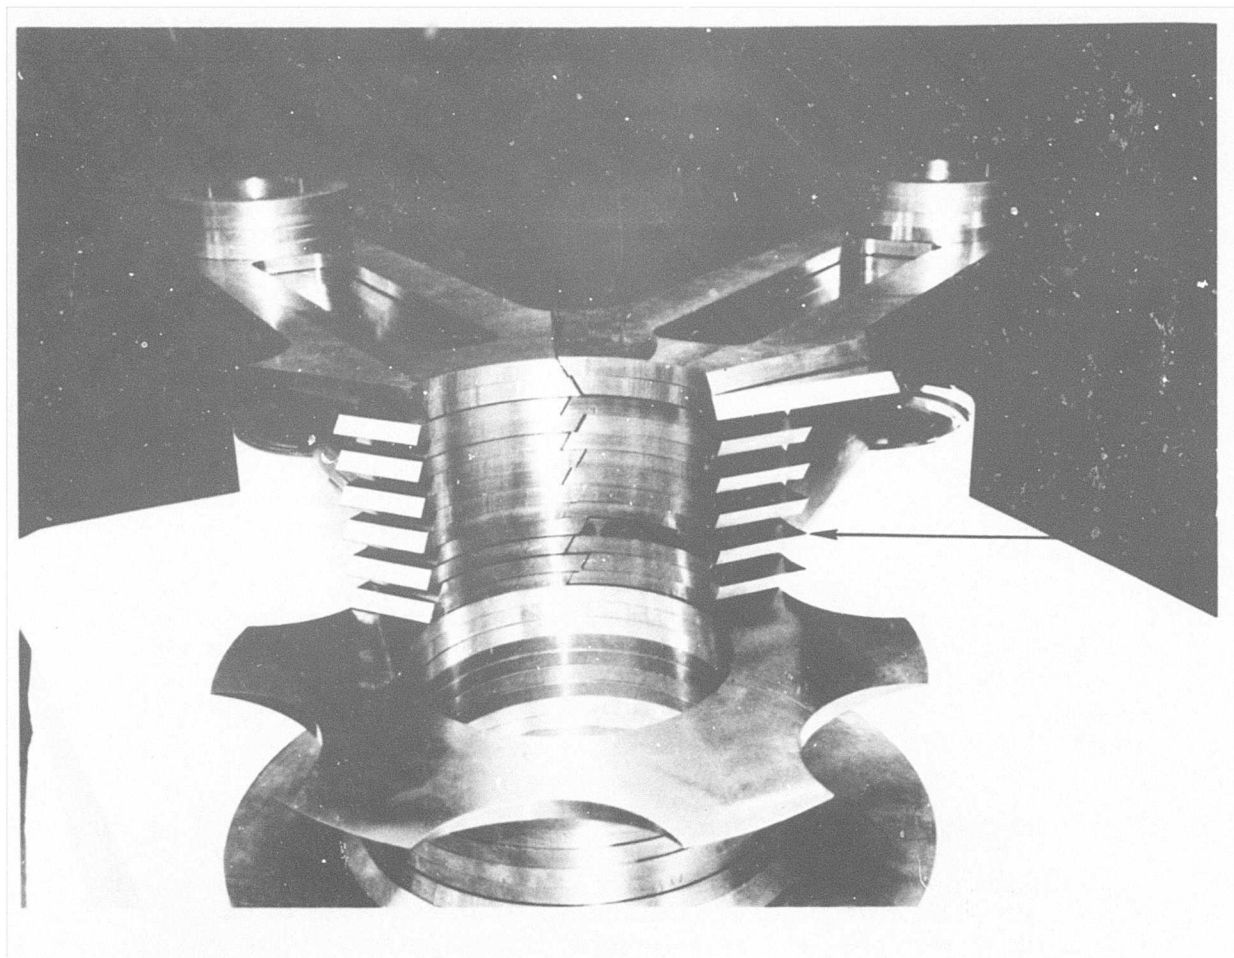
Photograph of Rotor Hub Laminates Showing Scarf Joint Details
